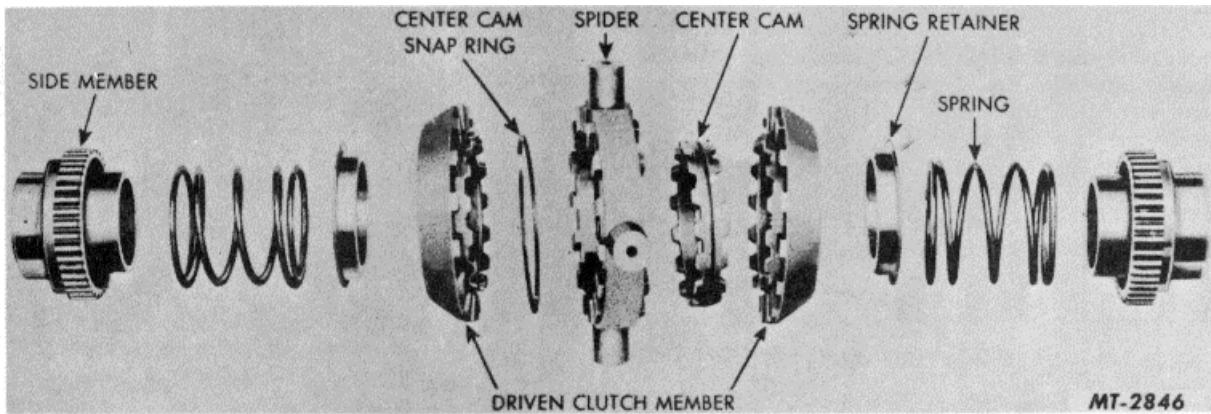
Internal Spring Design Differential Locking Unit (Exploded View)
